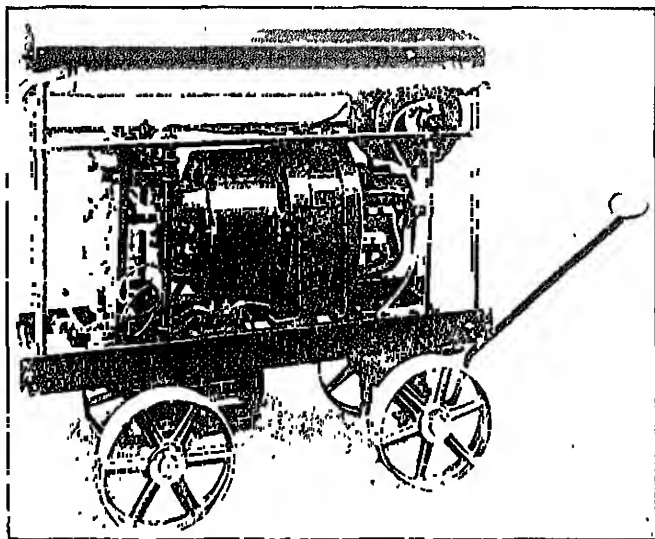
U. S. L. Portable, A-C. Motor-Generator Set.
